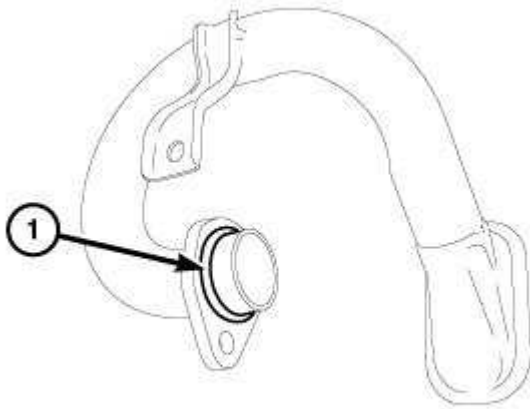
Oil Pump Pick-Up Tube O-Ring Seal
